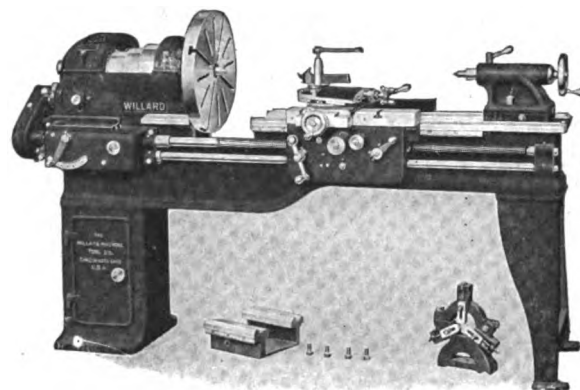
13x21-Inch High Power, Double Back Geared Semi-Quick Change Engine Lathe
